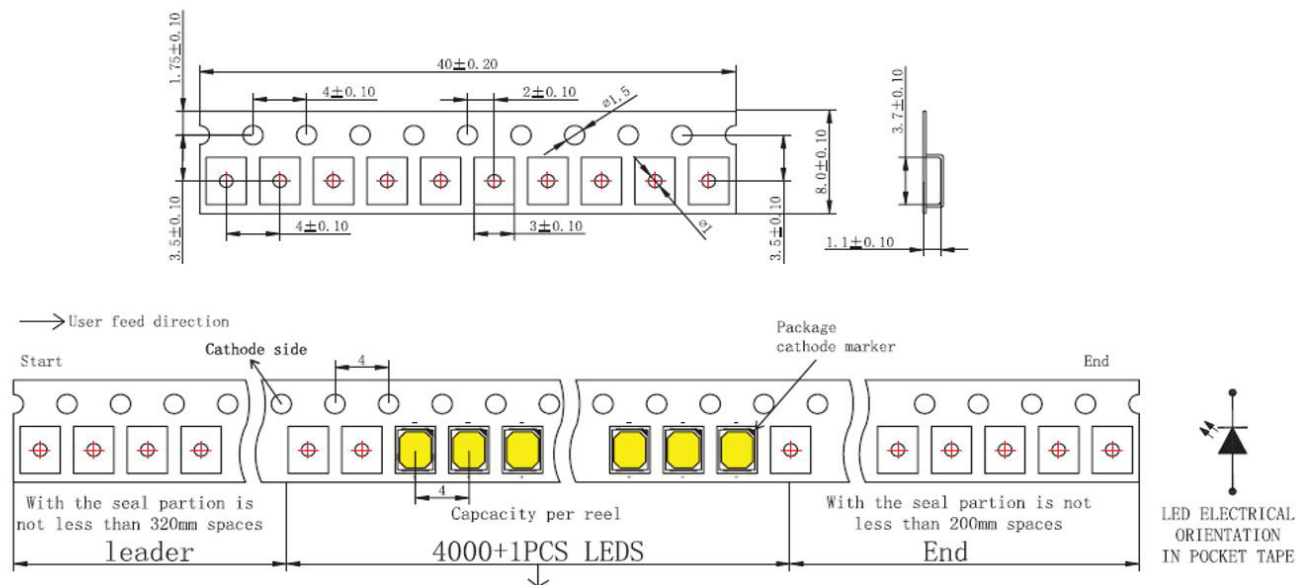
Pocket tape dimensions for LUXEON 2835 Commercial Deep Dimming
